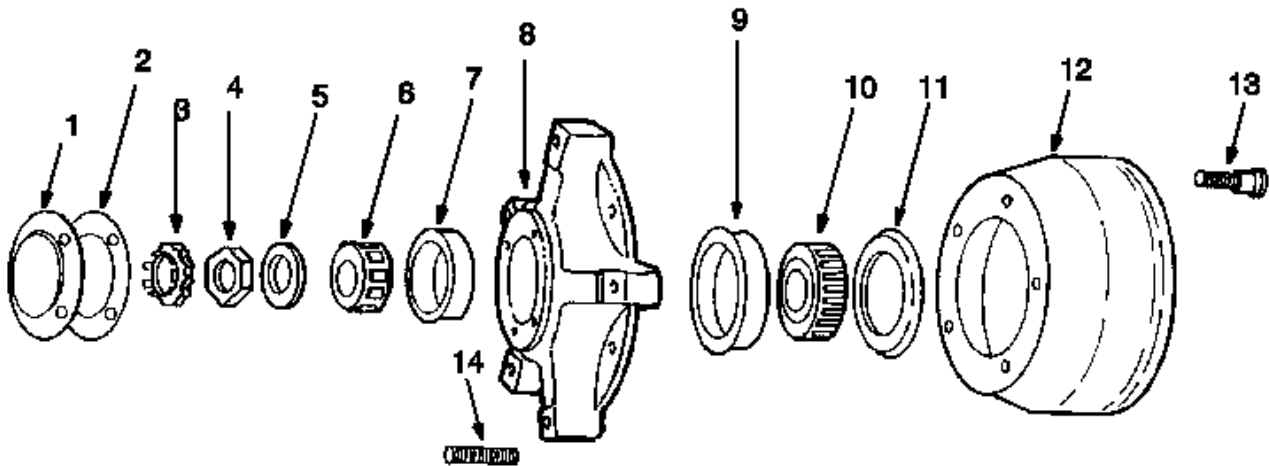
Exploded View of Typical Cast Spoke Front Hub Assembly with Drum Brakes
